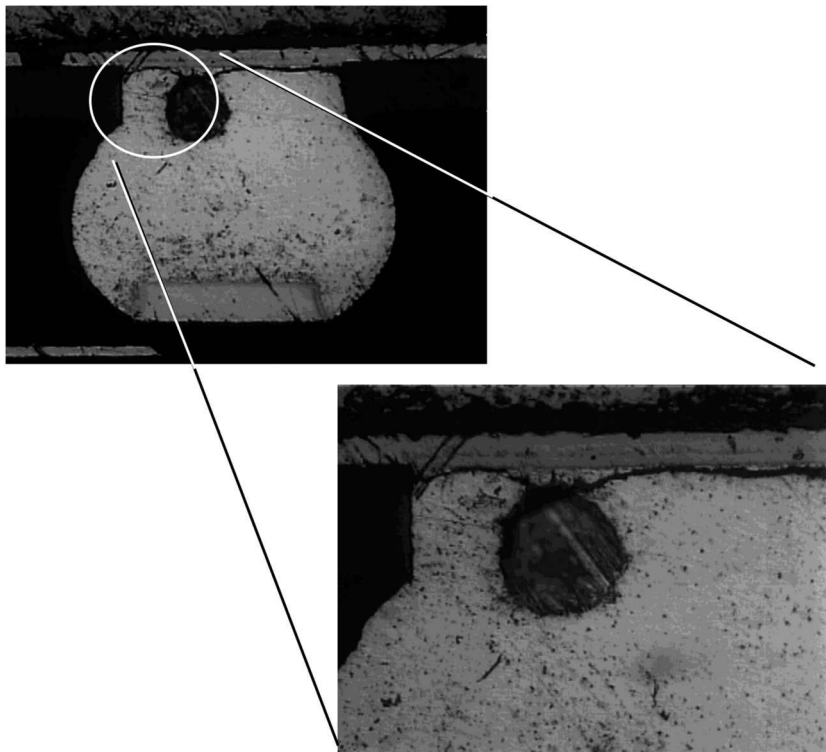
shows an cross-section of a Flex-Substrate BGA after thermal fatigue failure. The 48 I/O, 0.8 mm pitch Flex-Substrate BGA packages (SRAM) were soldered onto a 0.8 mm thick,
